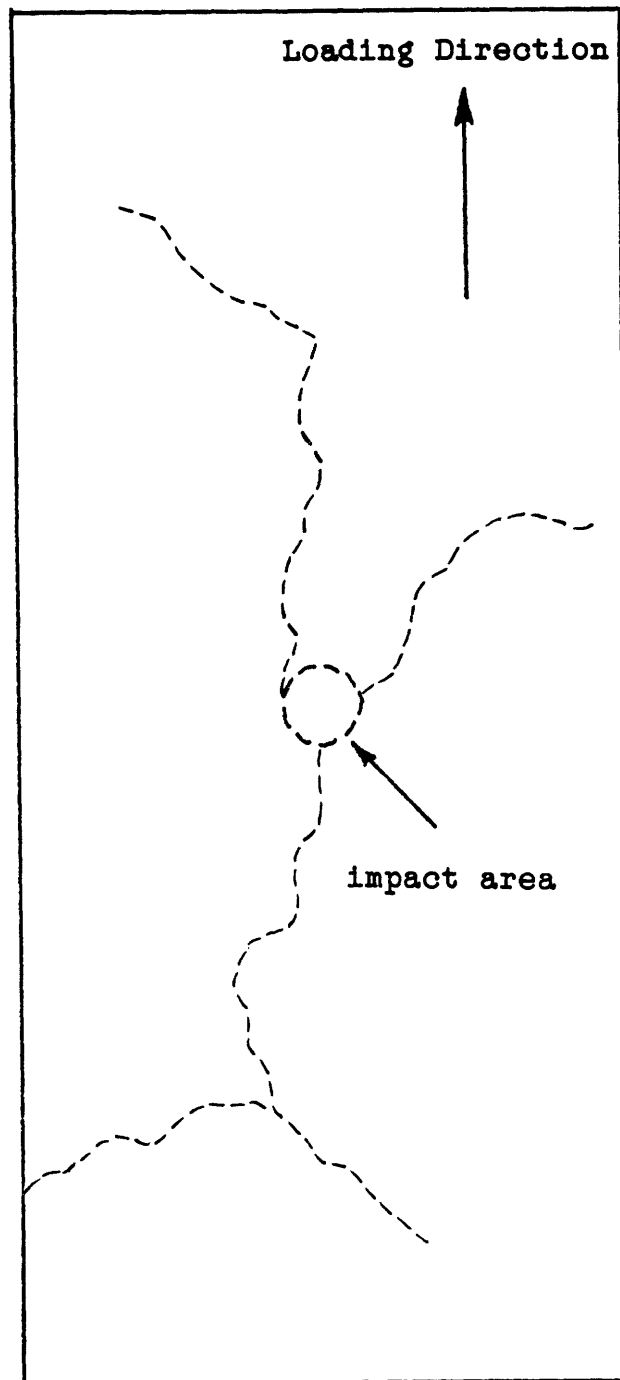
Sketch of Wrinkling Pattern on Plate Specimen Face
